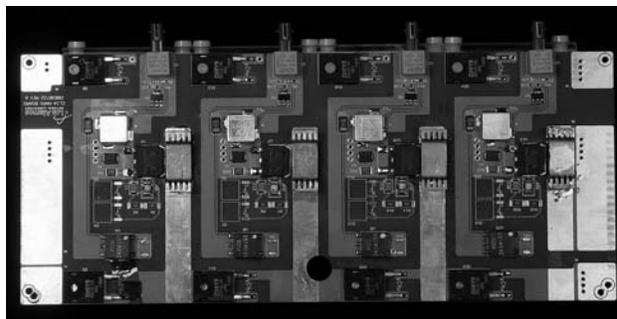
Front view of the circuit board showing four optical fiber ports, four switches, and four metal enclosures containing the gate drive electronics.
